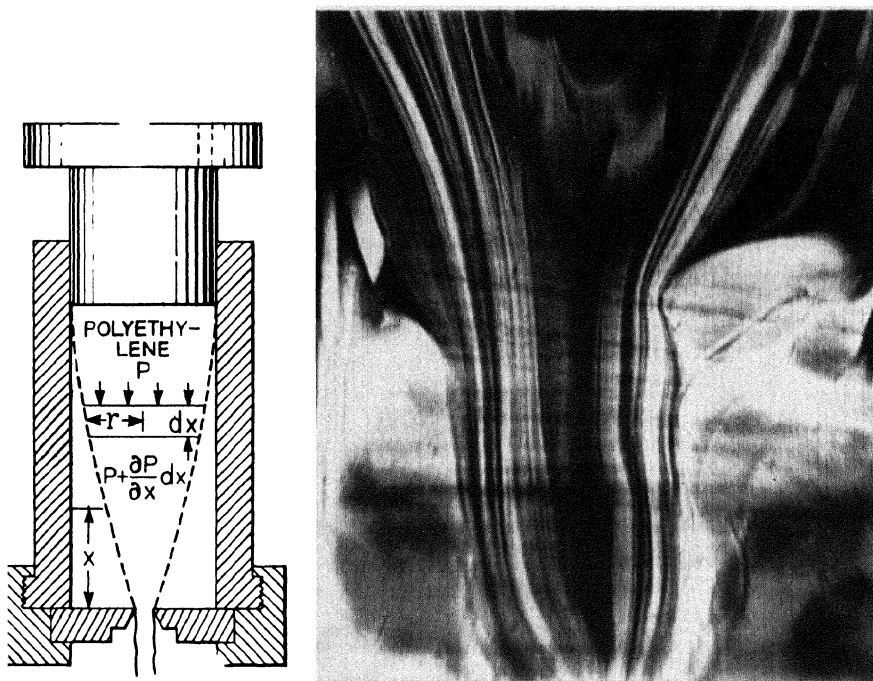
Left: Diagrammatic cross section of extrusion chamber and die. Right: Flow pattern in polyethylene in extrusion chamber. The bottom edge of the picture coincides with the plane $x = 0$.
